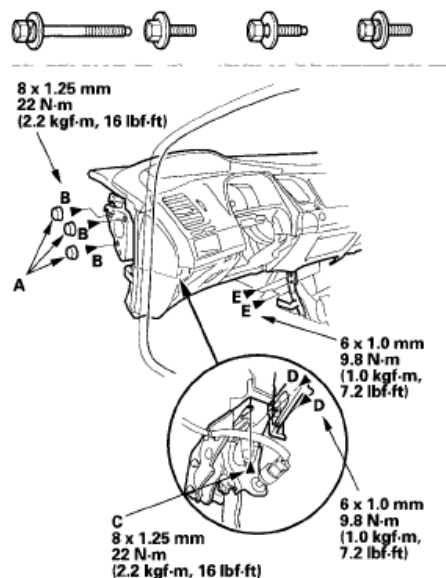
Removing Caps (4-Door Only) And Outside Driver's Door (With Specifications)
